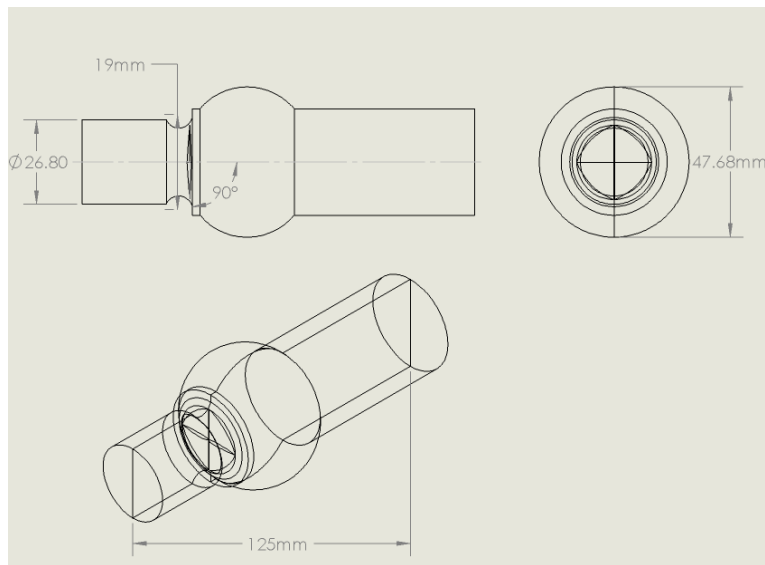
3D Valve fully closed at 90° (All units in millimeters)
